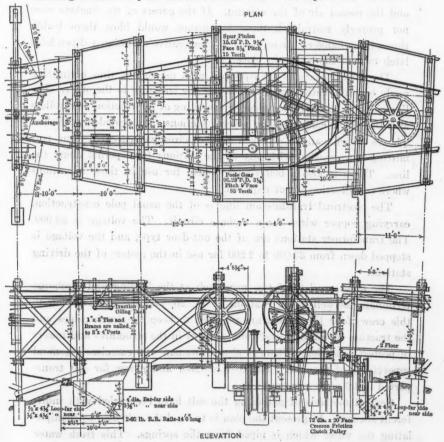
Part of Station 20, Showing Drives for Sections III and IV.
